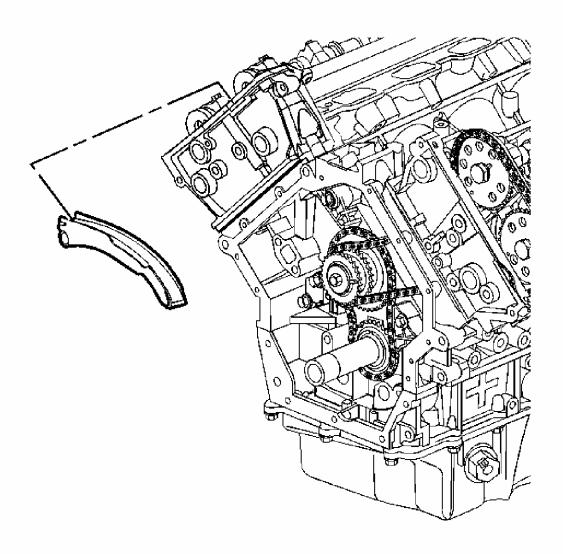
View of Right Secondary Camshaft Drive Chain Shoe Courtesy of GENERAL MOTORS CORP.
